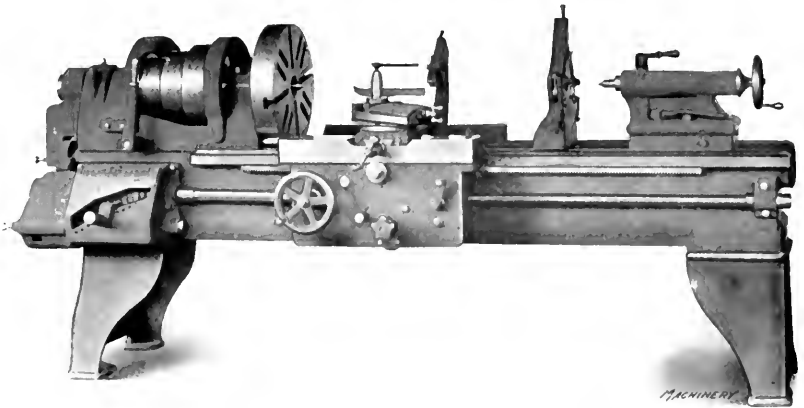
Front View of Cisco 18-inch Lathe with Double Back-gears
